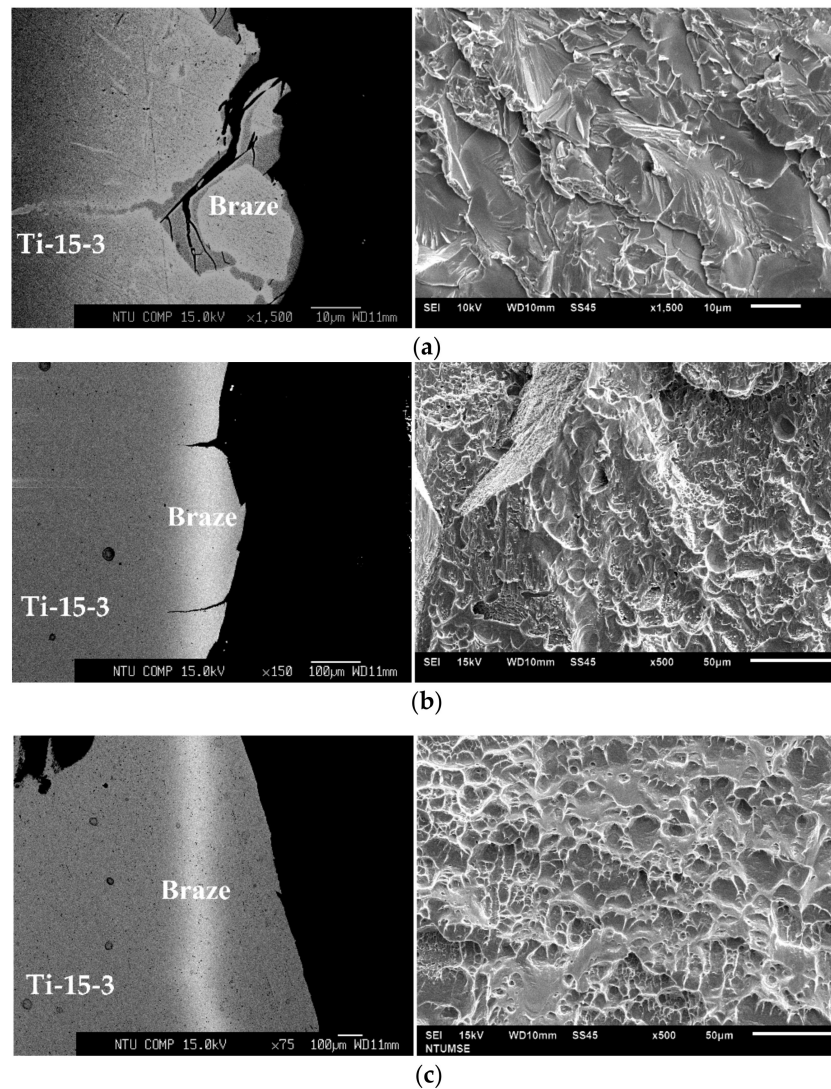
Joint cross-sectional views and fractured surfaces after shear test brazing at (a) 1000, (b) 1100, and (c) $1200^\circ\text{C}/600\text{ s}$.
